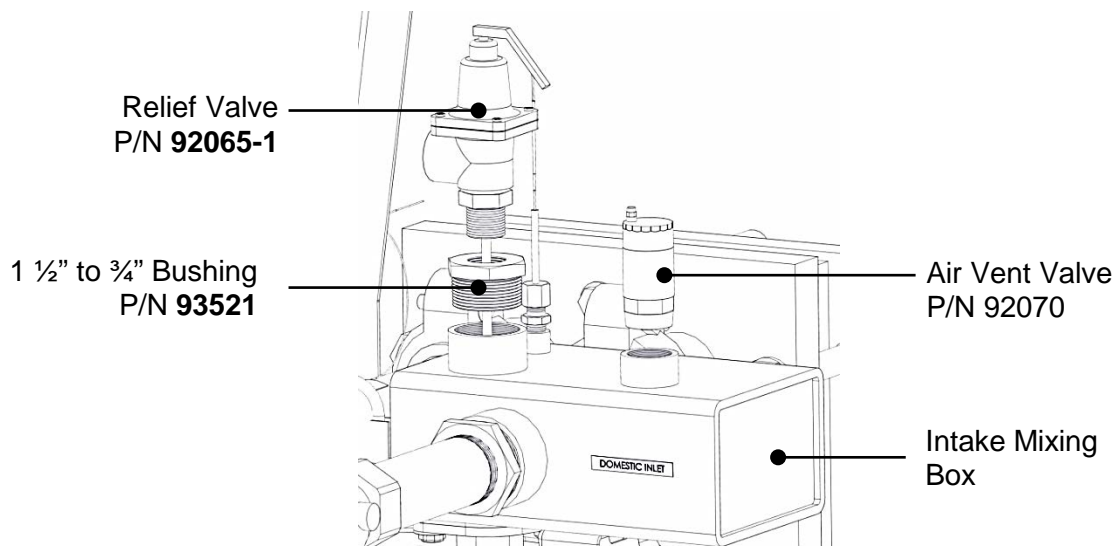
Relief Valve and Air Vent Valve Installation – 150 PSI – Exploded
